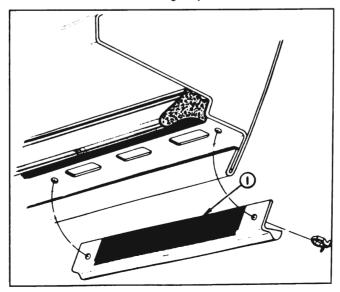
Lubrication of Door Bottom Drain Hole Sealing Strip
